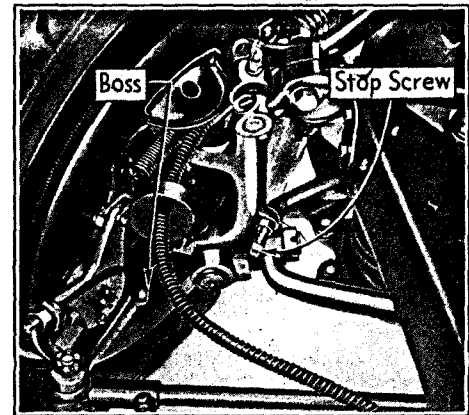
The stop screw should be adjusted so as to strike the boss when the steering wheel is turned two complete revolutions from the straight ahead position of the front wheels.
